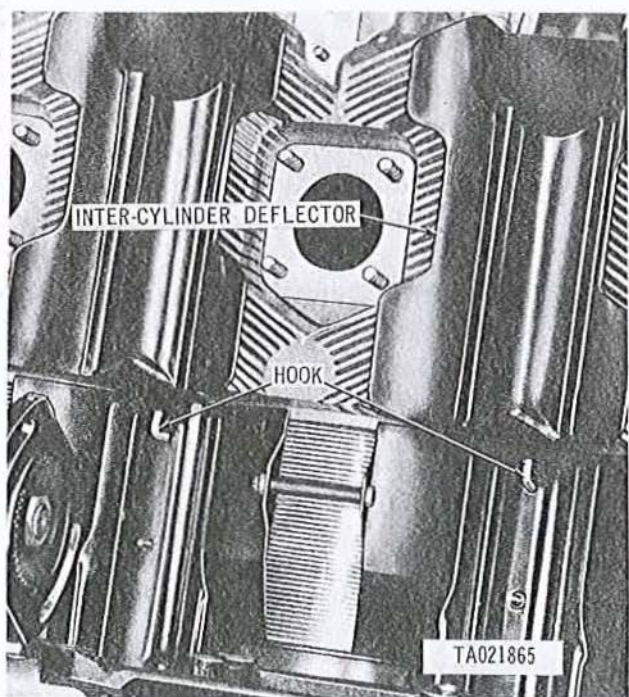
Removing or installing right intercyylinder deflectors and hooks.
